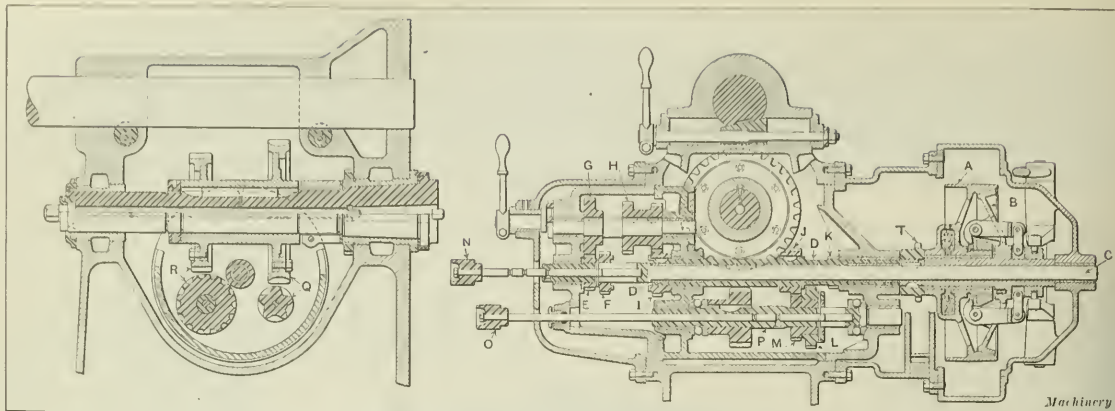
Cross-sectional View through Speed-box showing Arrangement of Change-gears
